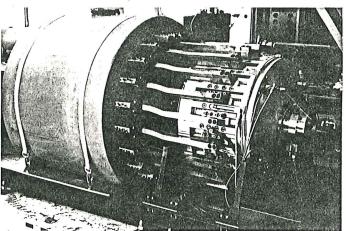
Upgraded HPG and coaxial inductor in the final stage of assembly
